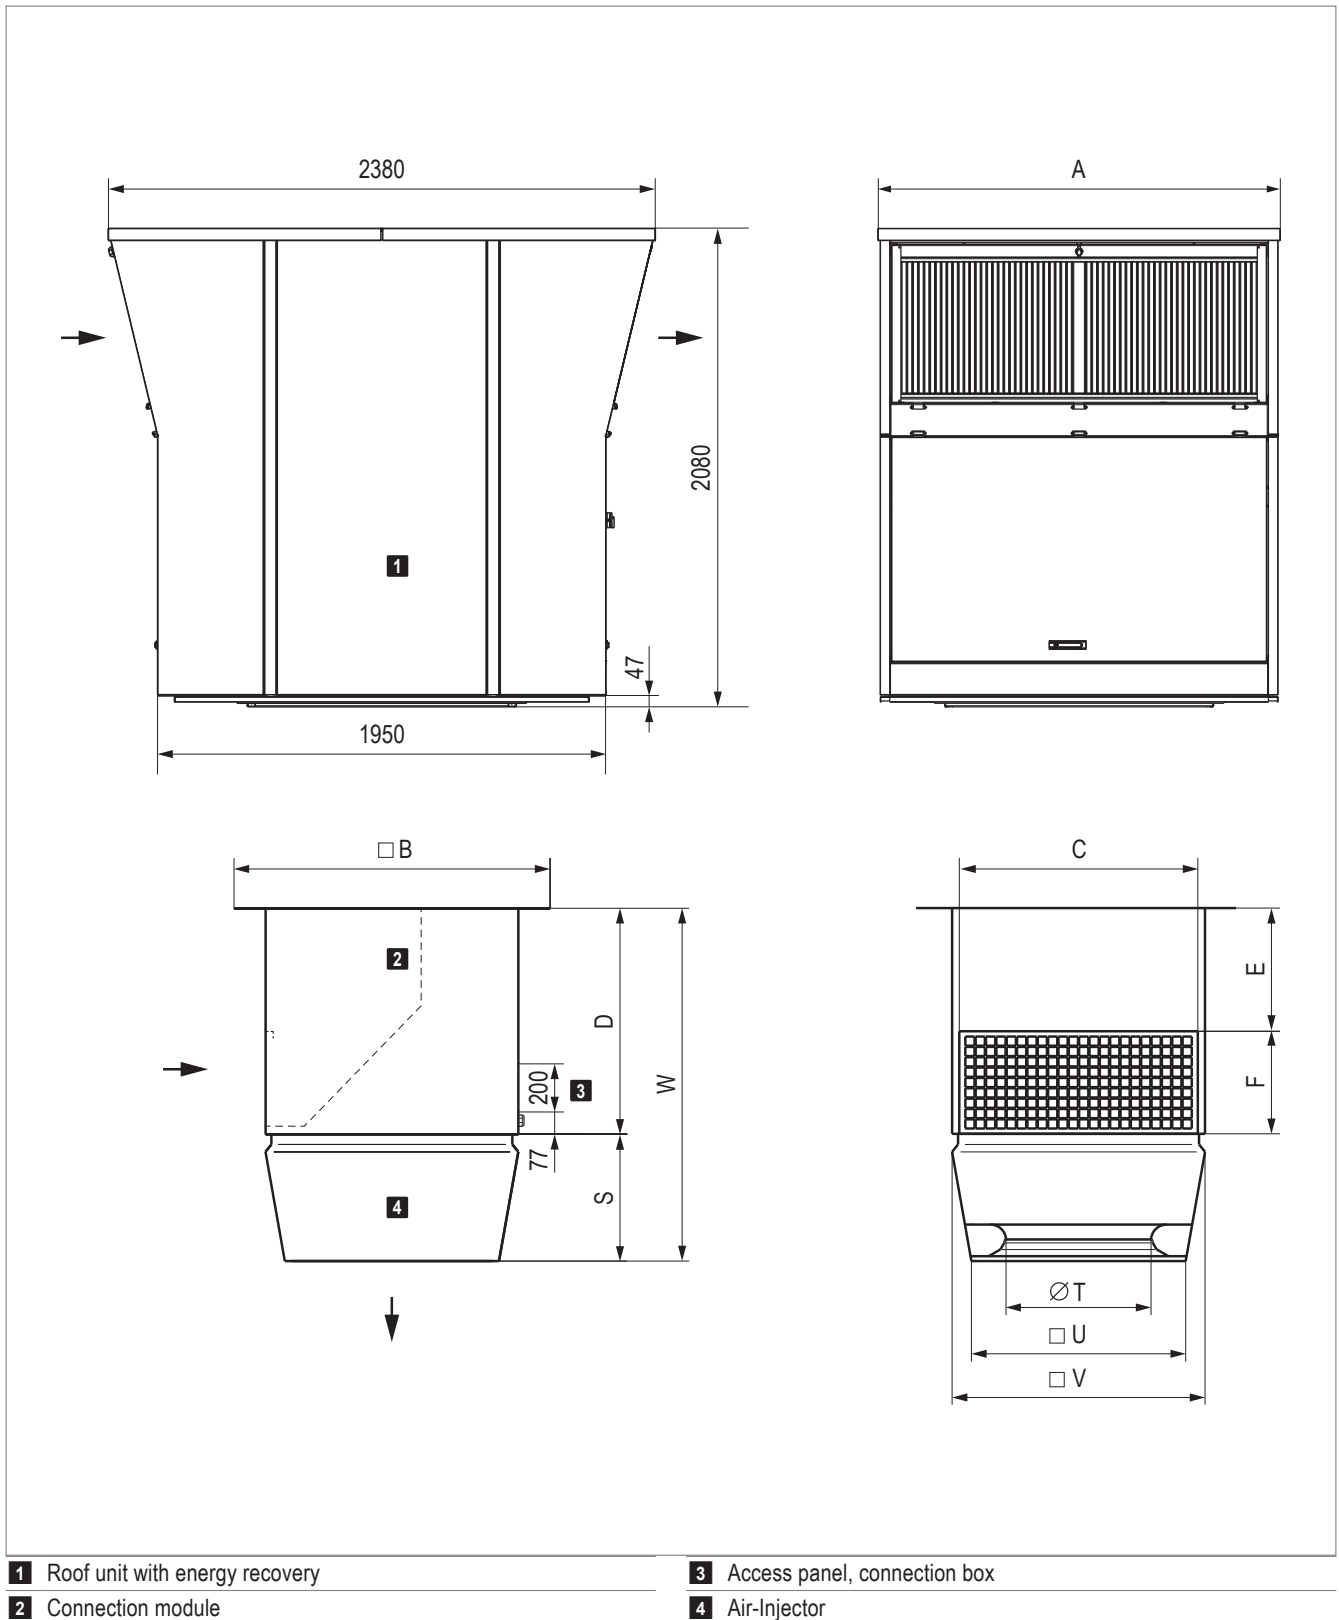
RoofVent® R dimensional drawing (dimensions in mm)
